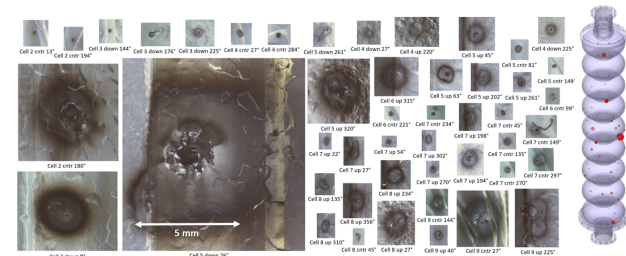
Left: defects on MT-4 inner surface after performing VT2 (all pictures are at the same scale), right: locations of the defects.
